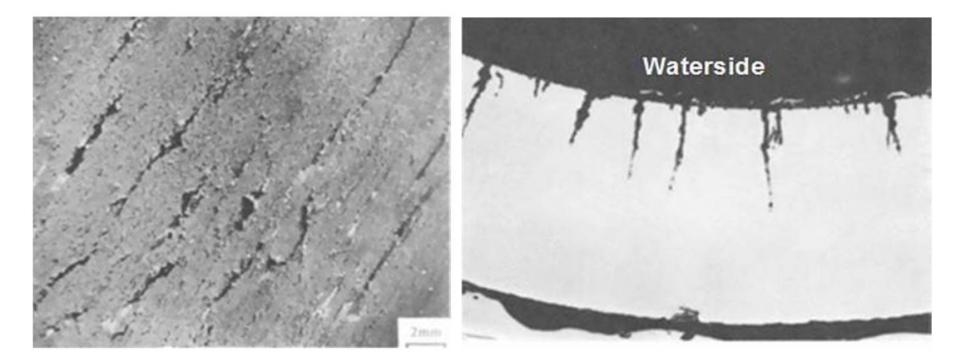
Internal surface (left) and cross-section (right) of hot wall from 65 mm (2.60 in.) tube in a power boiler (1).
